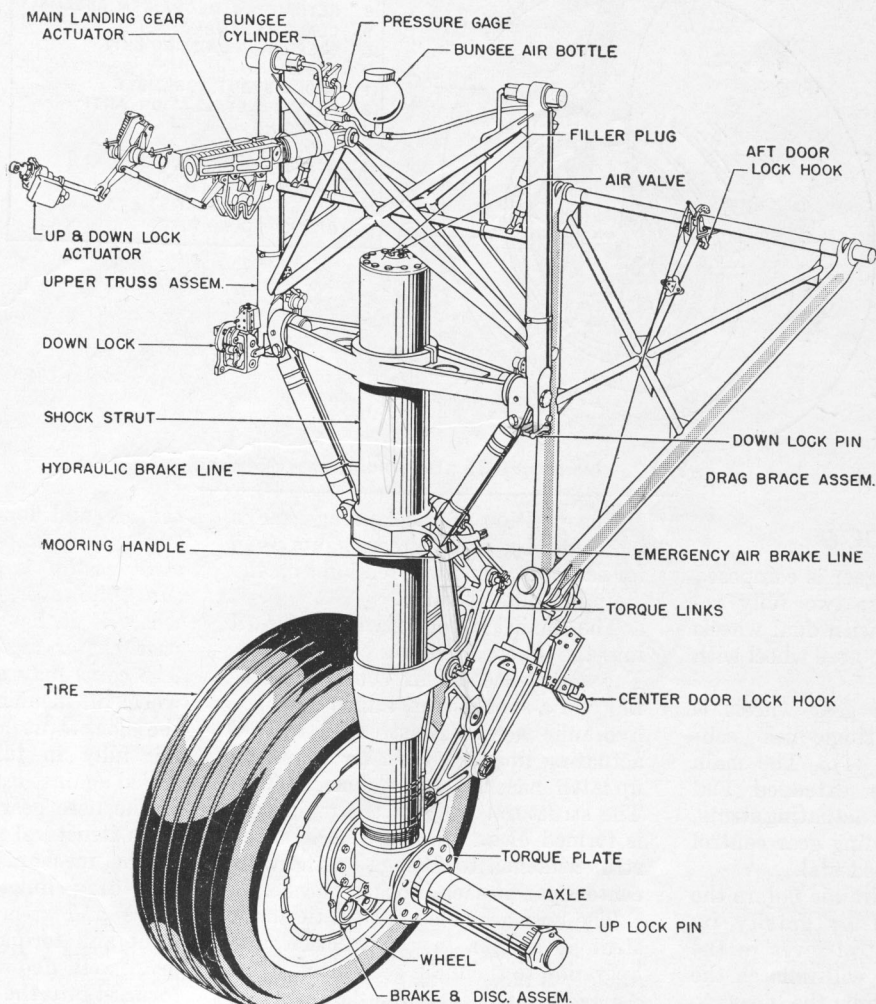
Main landing gear assembly of the Northrop B-35 bomber.
